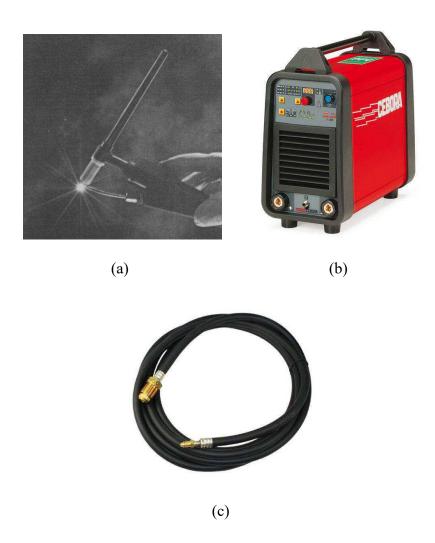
TIG Welding Equipment (a) Torch (b) DC (c) Cable (Source: Muncaster, 1991; Direct Industry; Bob the Welder)
